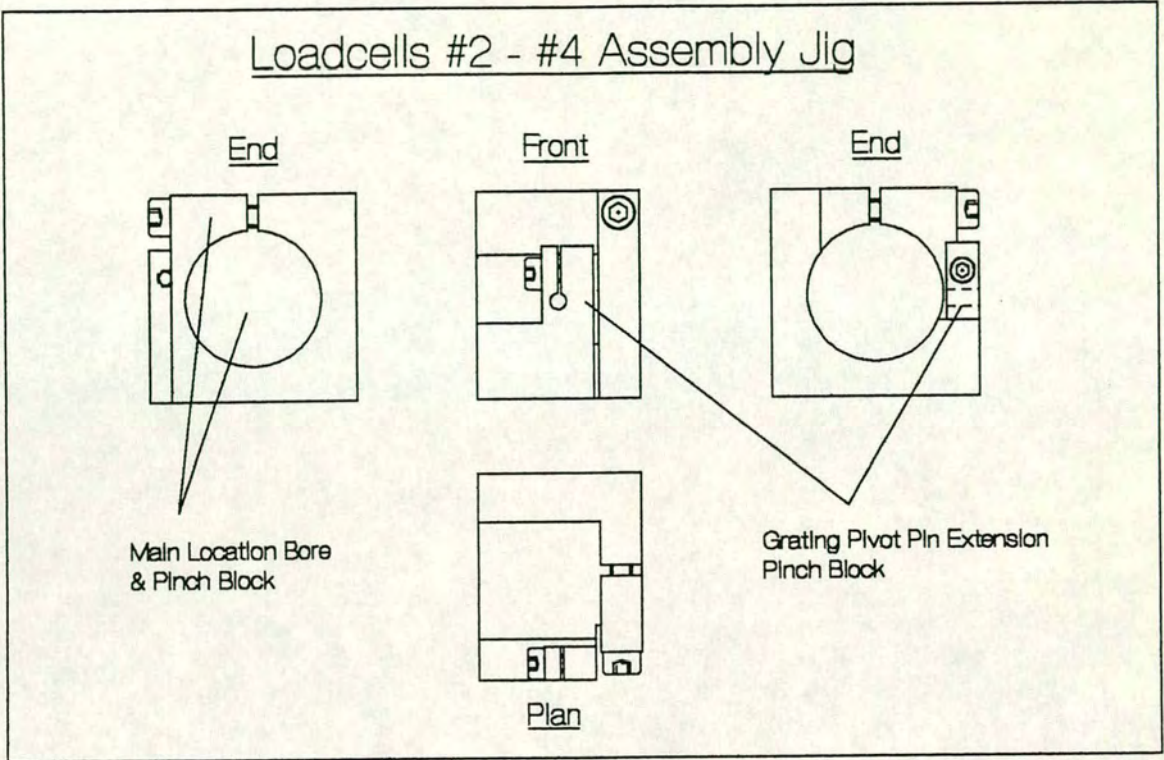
Loadcells #2 - #4 Assembly Jig
